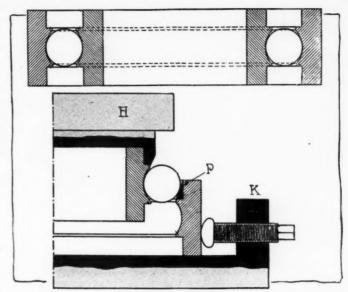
Illustrating the new method used by the Hoffman Mfg. Co. In assembling its annular ball bearings. To force the two concentric rings into position, the wedge P is fitted at one side of the outer ring. The outer ring is gripped in chuck K and revolved at high speed. Pressure applied at the head H force the balls into high speed. At the same time pressure is applied to the head H containing the inner ring and the balls are forced to travel up the wedging piece P so that they can slip into their proper places in the races. The Hoffman company has found this method of assembling its bearings very efficient and generally satisfactory
